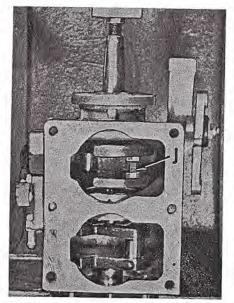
When pressing out the crankshaft assembly, place a jack (J) between counterweights of upper crankpin as shown.
